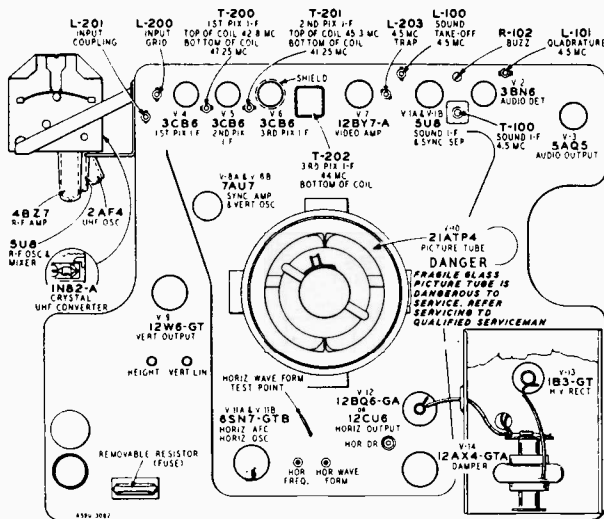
UHF-VHF Chassis Tube Layout and Trimmers
